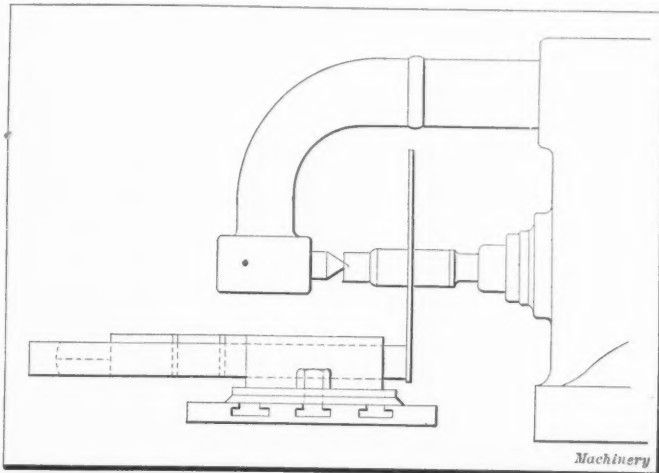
Method of cutting Valves from Bar Stock in a Milling Machine
